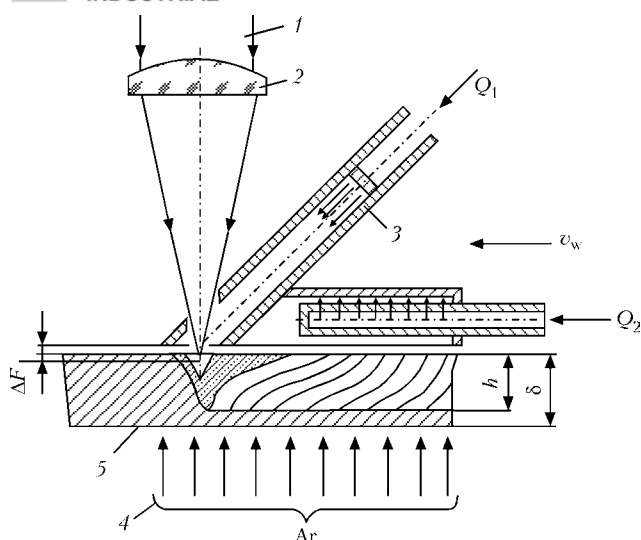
Scheme of laser welding with differential shielding of weld pool and cooling metal by using laminar gas flows: 1 – laser radiation; 2 – focusing lens; 3 – nozzle for differential feed of shielding gases at flow rates Q_1 and Q_2 ; 4 – shielding of weld root; 5 – workpiece
